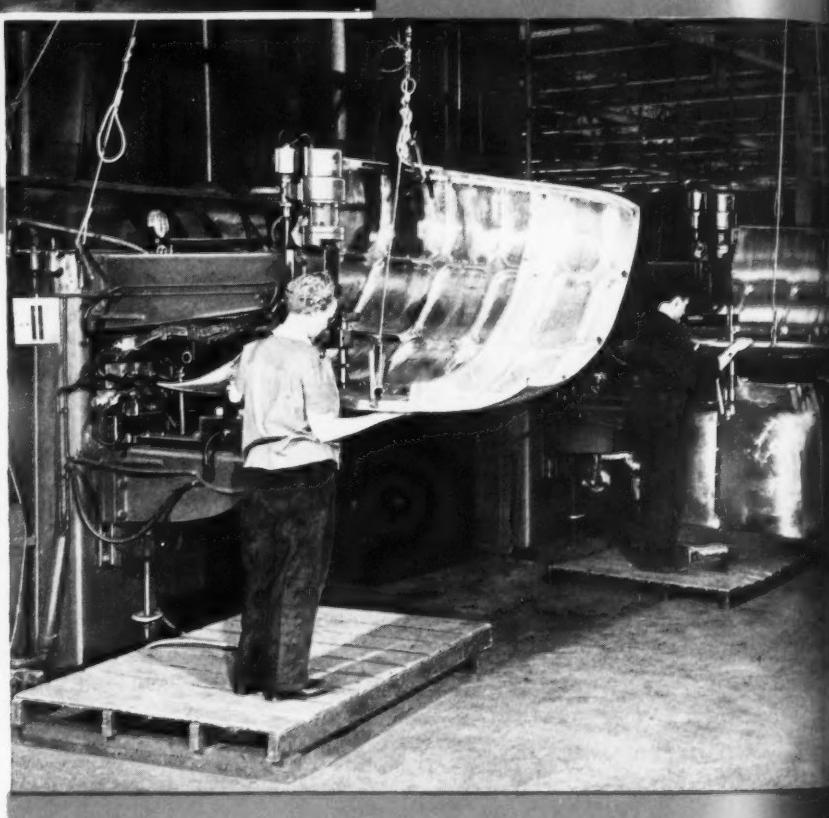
Heavy Spot-welded Assemblies are Easily Handled by Women with the Aid of Suspension Holding Devices. The Spot-welding Machine Shown has a Throat Depth of 4 Feet
